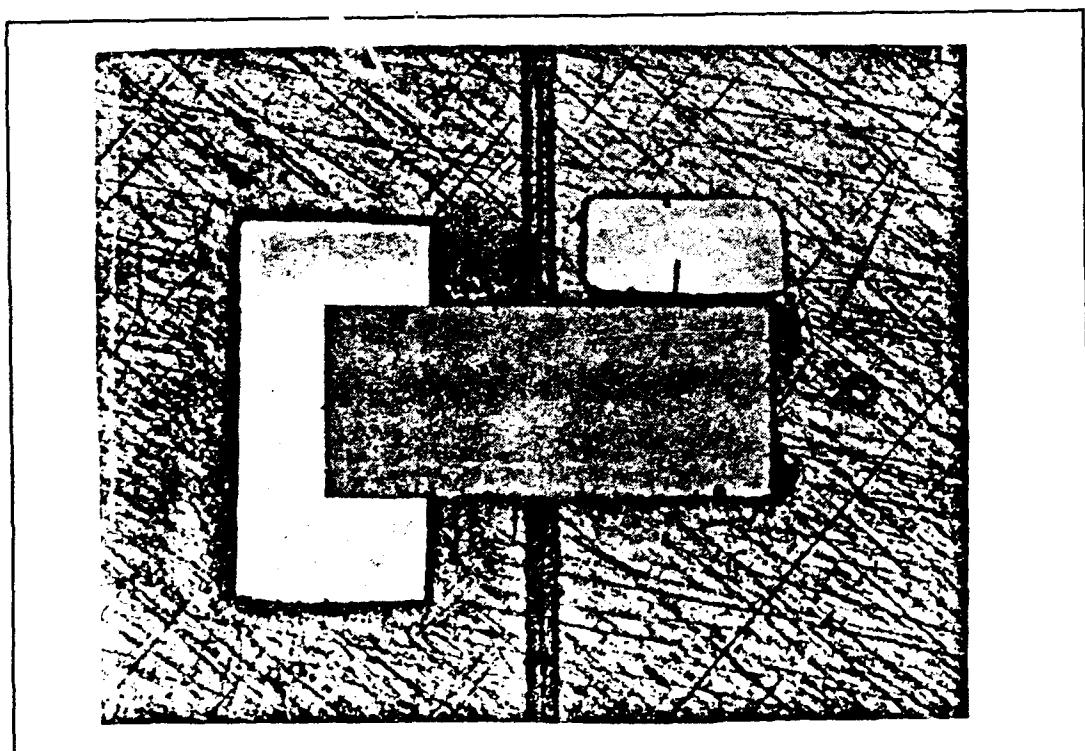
Same region of the mounting fixture as in Fig. 6.16 but with chip in place.
